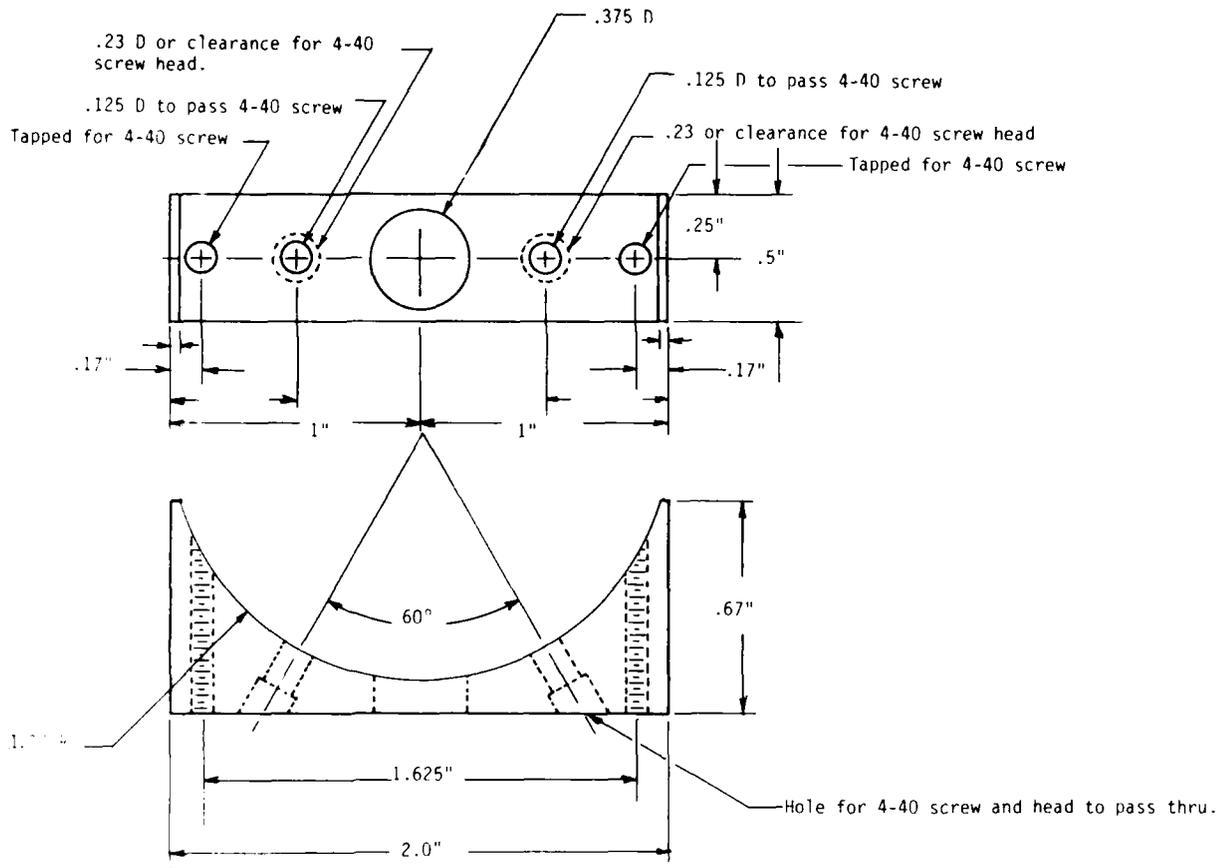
Chopper motor mount; unless otherwise specified, tolerances are  $\pm .002$
